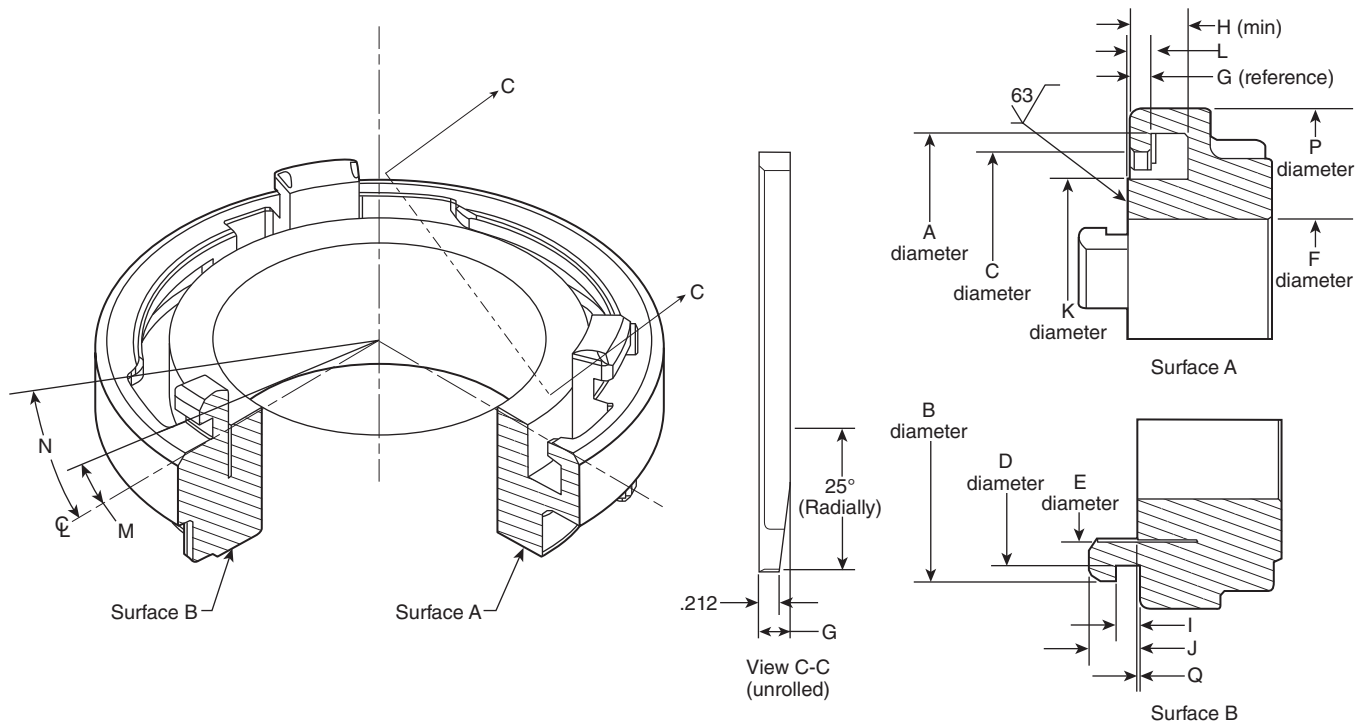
Test Wrench for Force to Connect Test of 6 in. (150 mm) Connectors.
